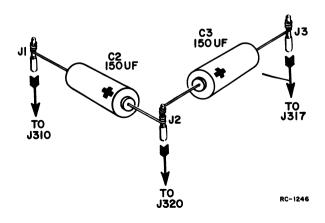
Installation of Capacitor Assembly C2-C3 on Rcvr Audio Board.
